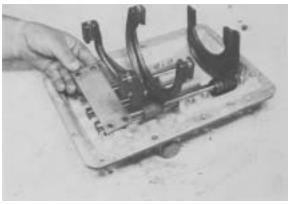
Position front rail support over shift rails and install capscrews. Position rear support over rails and install capscrews.
